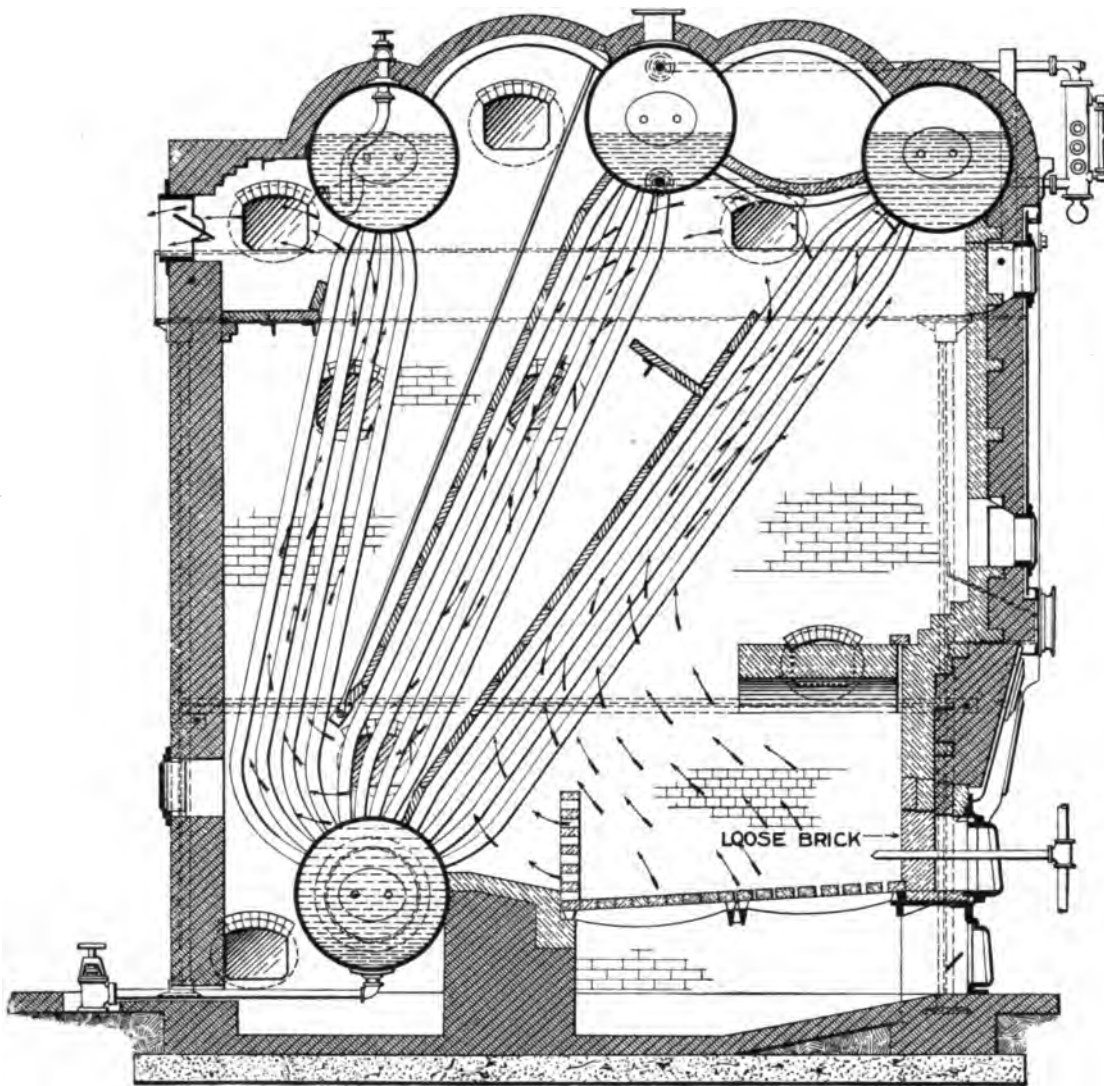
SECTIONAL SIDE ELEVATION OF STIRLING BOILER FOR BURNING PETROLEUM OR NATURAL GAS
